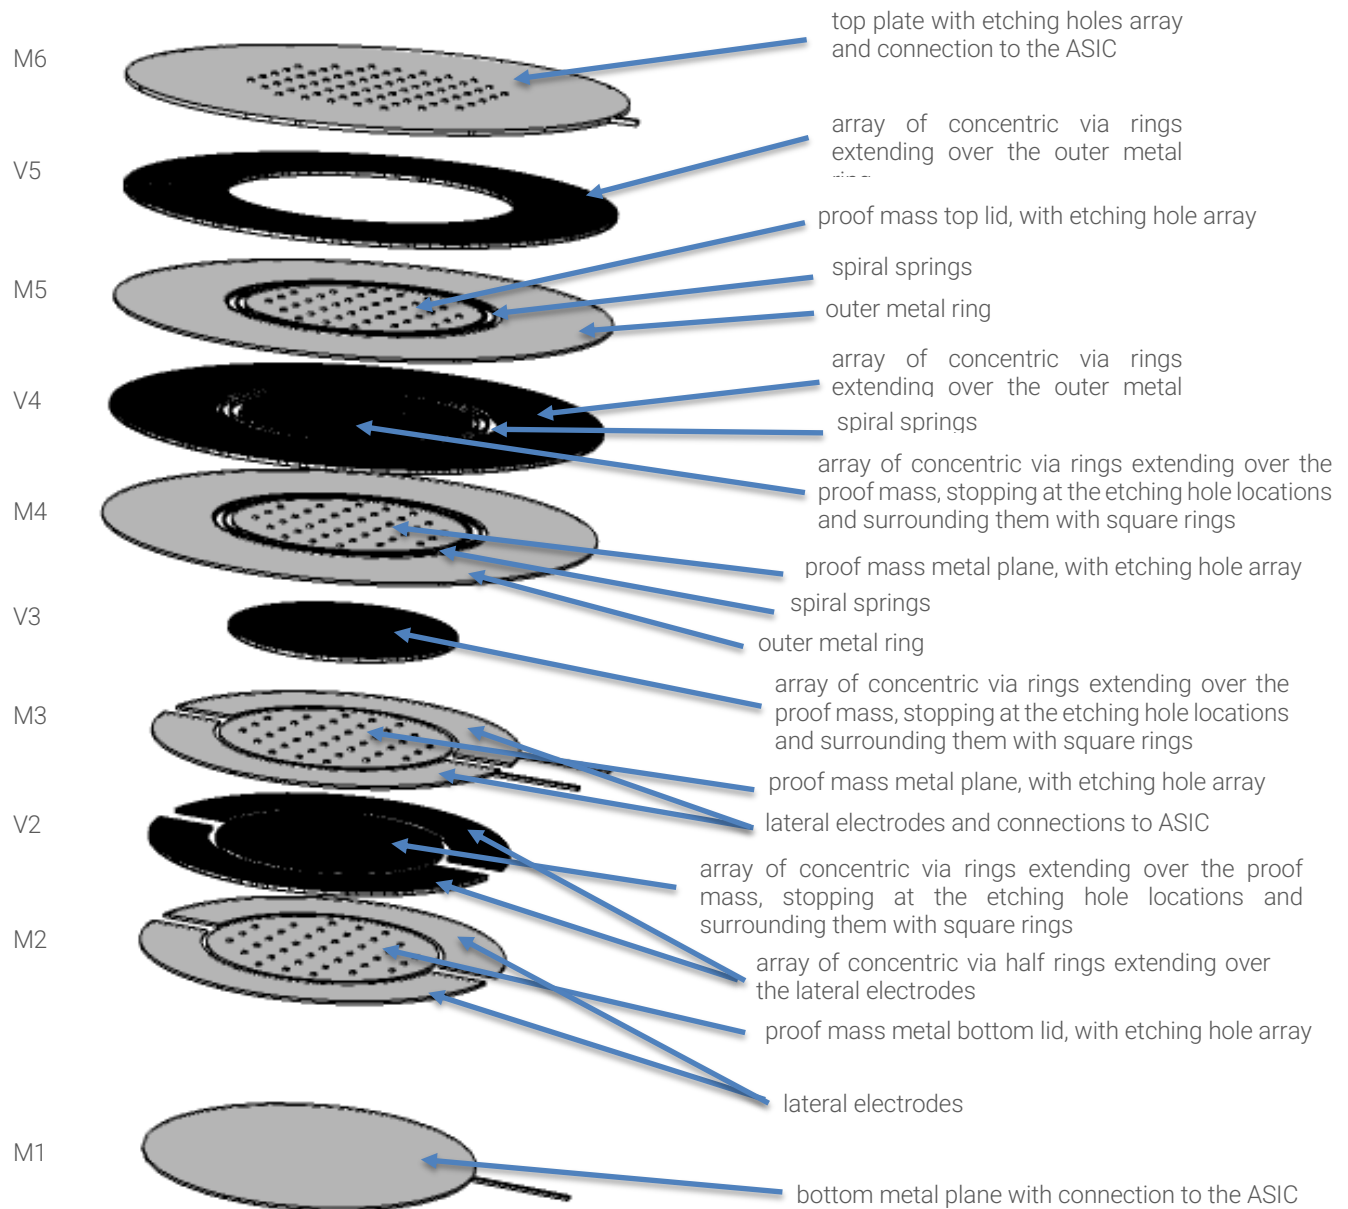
Exploding view of the 3D CAD of the metal and via layers only without showing SiO₂, passivation and substrate.
